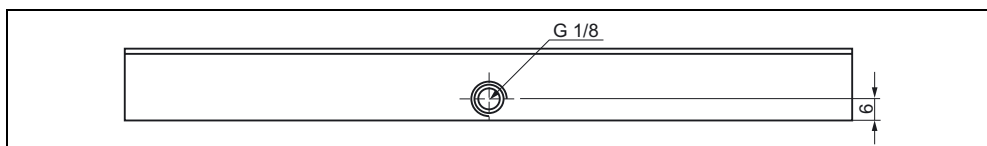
Connector layout of the secondary section cooling with combi distributor (face view)
